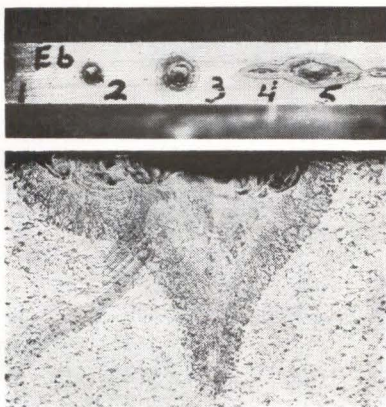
illustrates spot welds obtained. Upper view is that of edge rejoined after breaking for examination of interface as shown in lower view.
